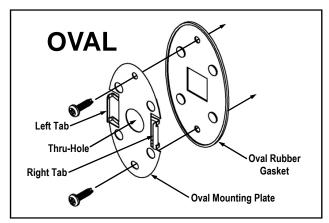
A: "OVAL MOUNTING PLATE" (WITH LEFT AND RIGHT "TABS") AND THE "OVAL RUBBER GASKET"
